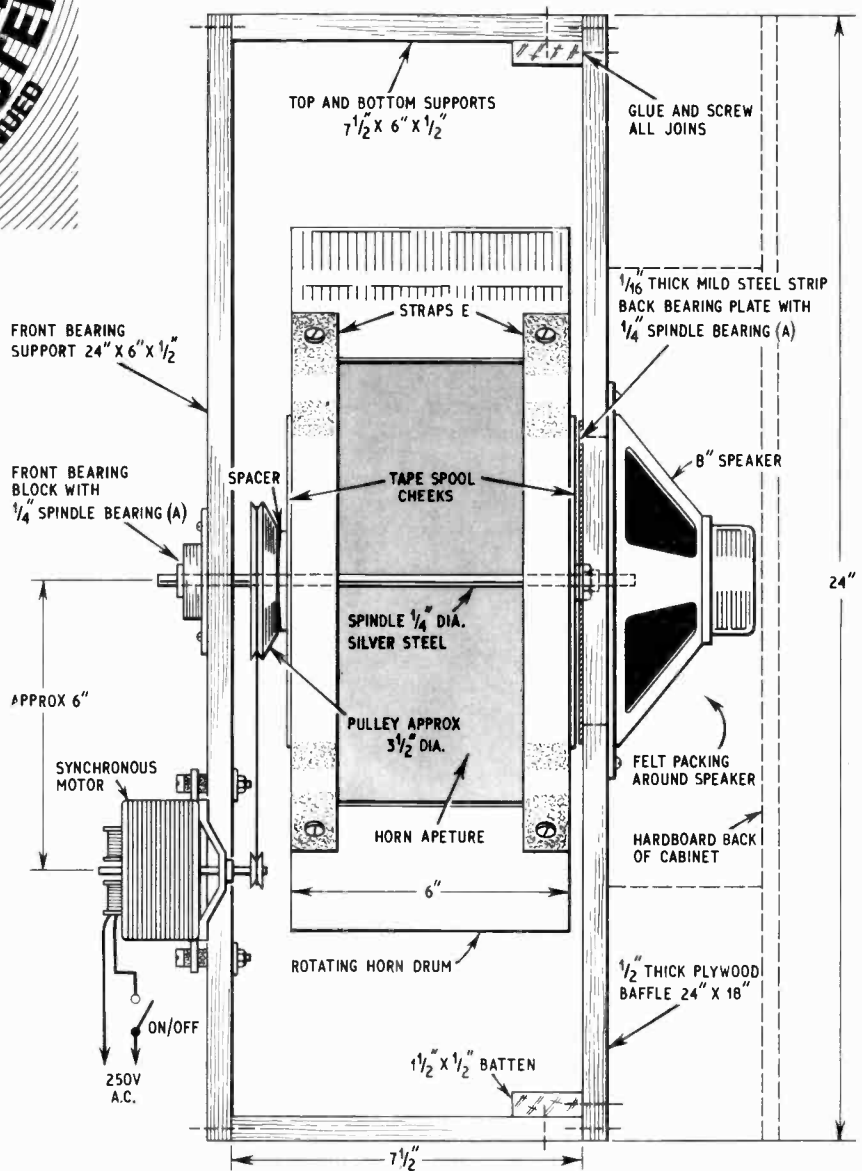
Completed assembly of rotary horn system in its supporting frame with the drive motor fitted
